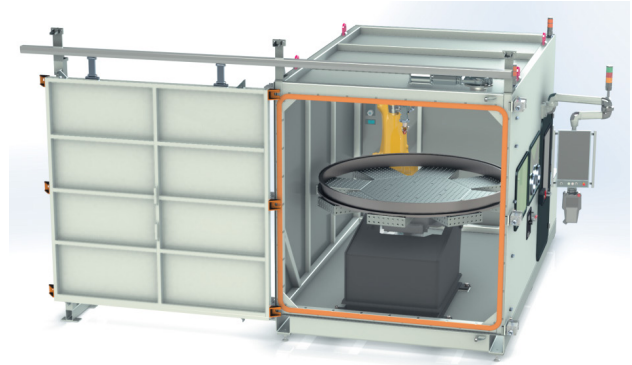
The in-house developed large-format robotic direct laser deposition machine.
